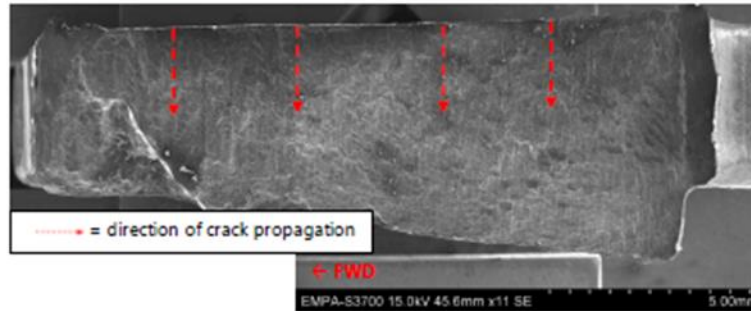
Overview of the RH side fracture surface (actuator side fragment, SEM-Image)
